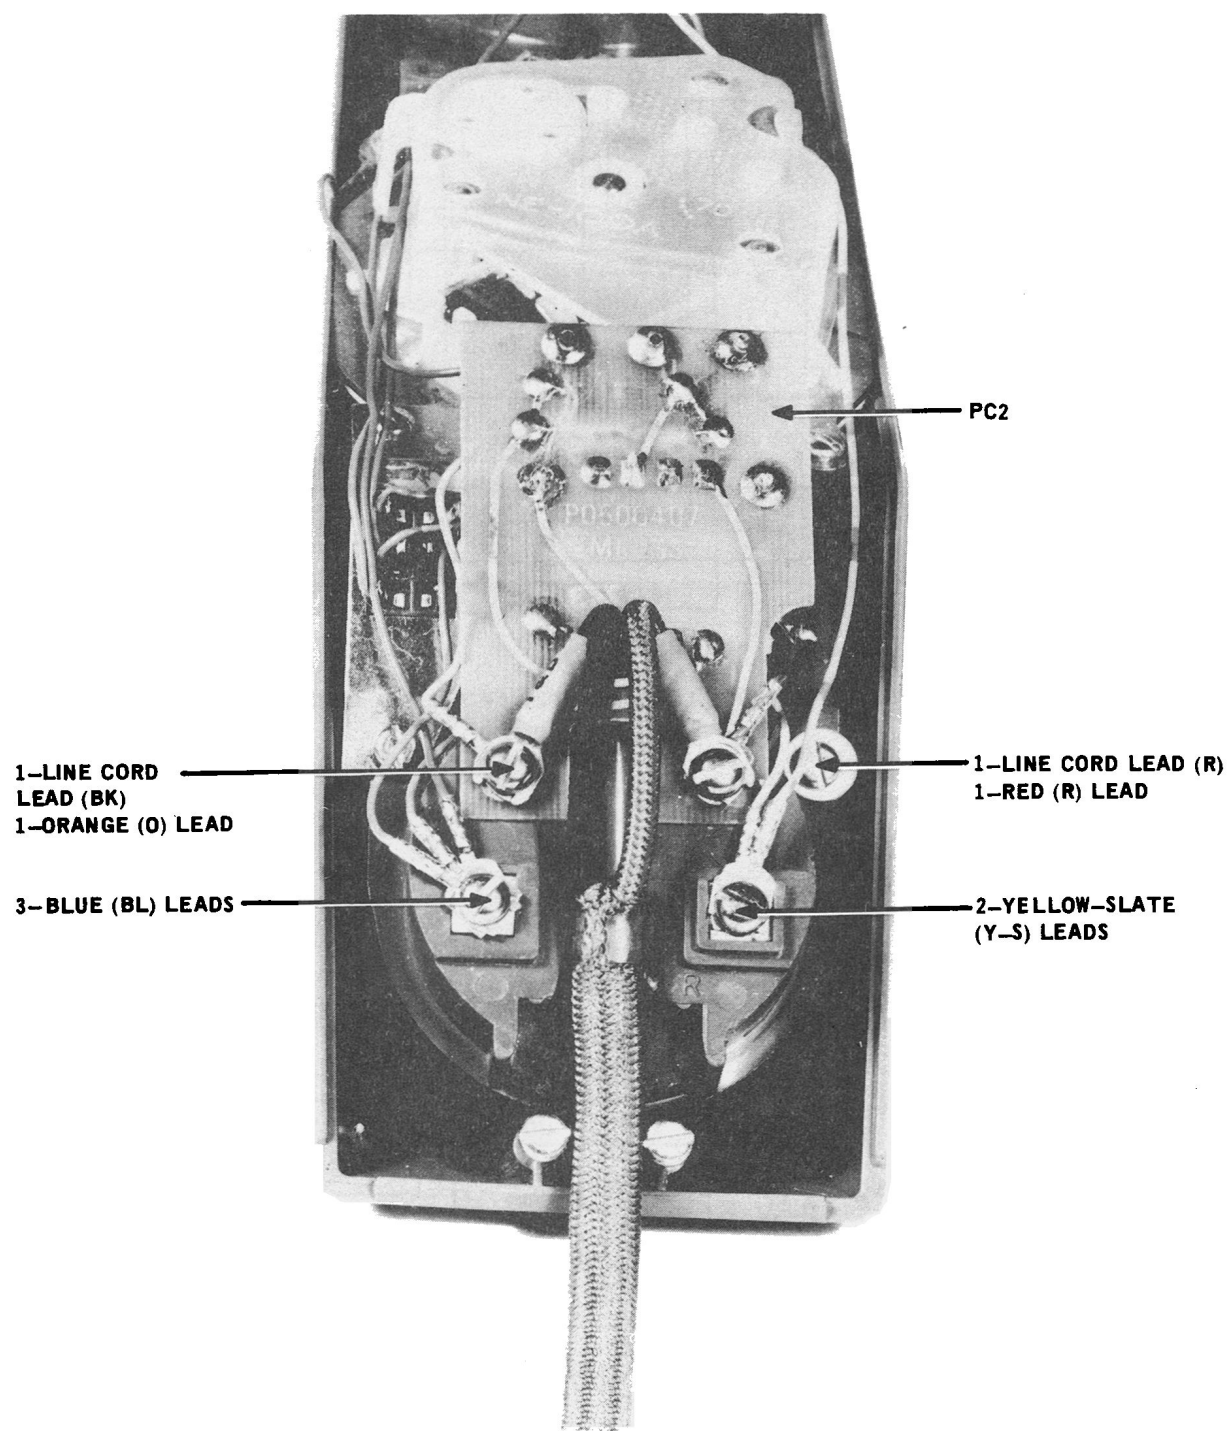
QSE4B Type Handset — Cover Removed — Showing Connection of Line Cord and Assembly of PC2 (P0500416) for Conversion Purposes
